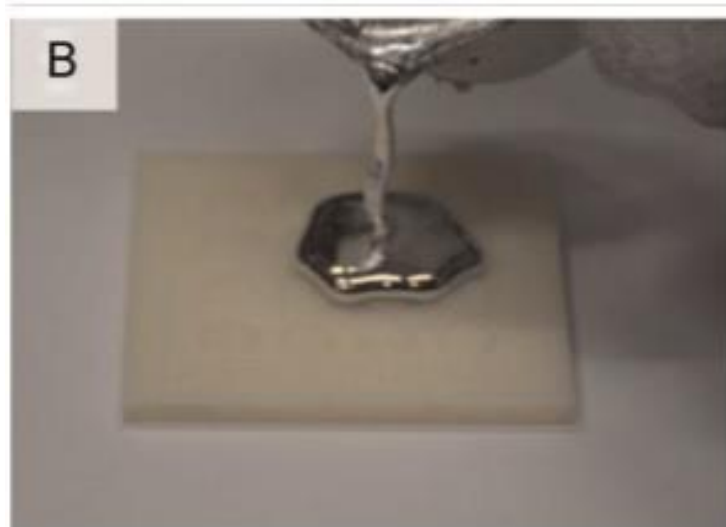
Molten metal being poured onto mold (example fabrication of a well-plate) [31].
